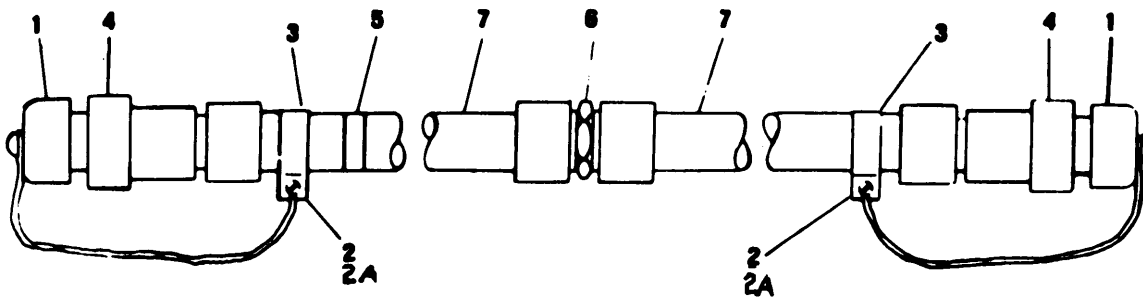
Three Quarter Inch Inlet Hose Assembly
